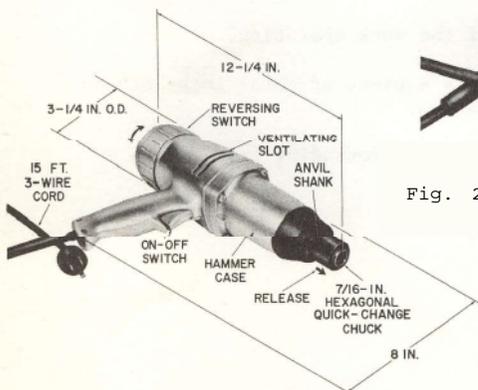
B Impact Wrench with END Cap Reversing Switch
